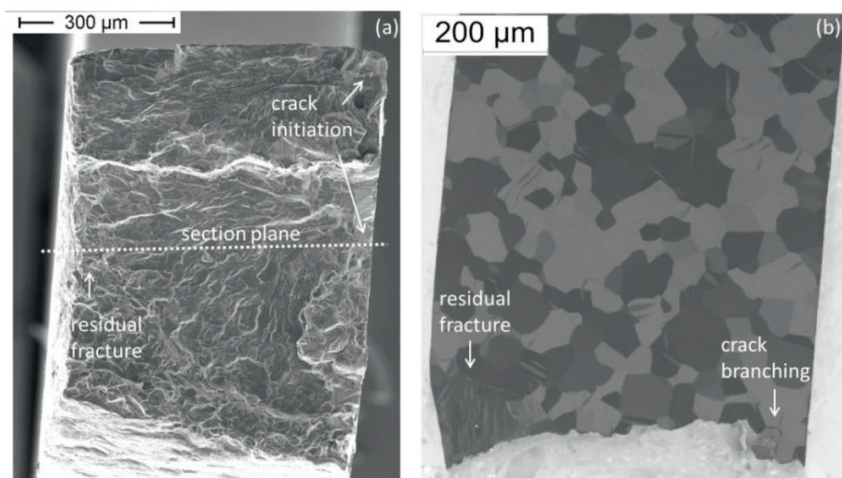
Fracture surface (a) and microsection (b) of specimen A (laser structured L1)
